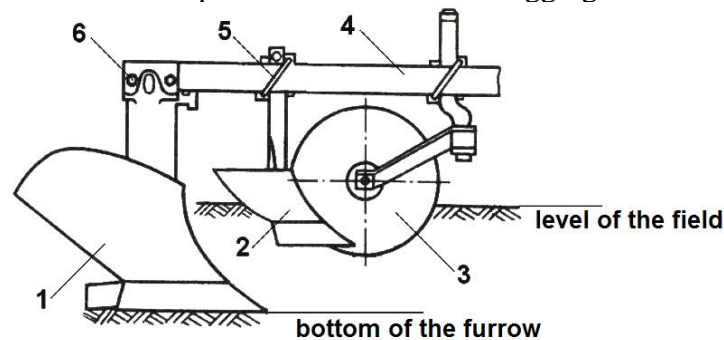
Scheme of moldboard plow with disc blade: 1 – plow bottom; 2 – small plow bottom; 3 – disc blade (rolling coulter); 4 – frame; 5 – bracket; 6 – fastening bolts
